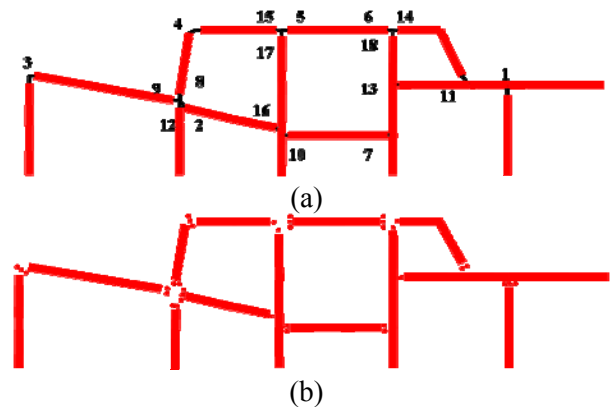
Optimum assembly of the sub-frame: (a) JSI, and (b) assembly strength (••• : class A assembly, •• : class B assembly, and • : class C assembly)
